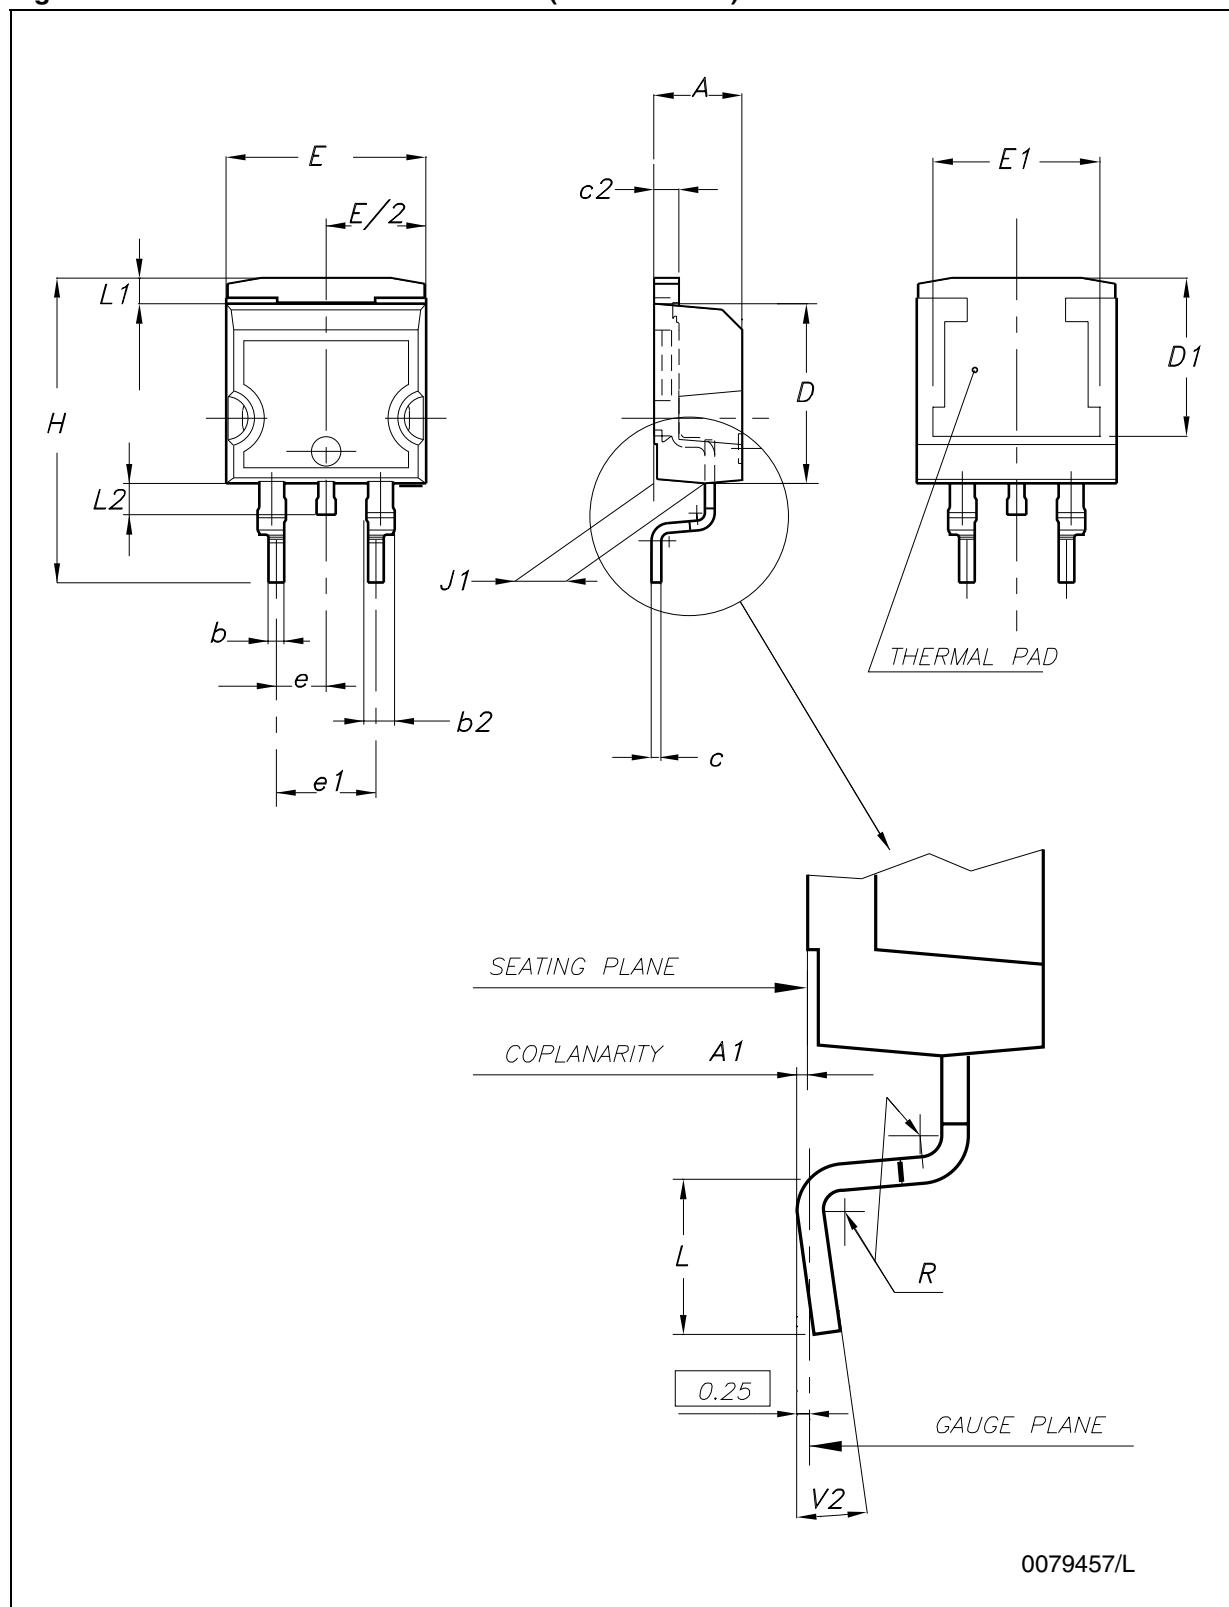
DRAWING DIMENSION D²PAK (TYPE STD-ST)
